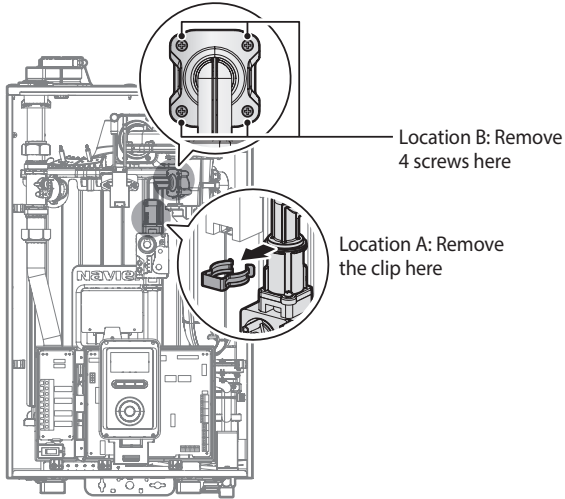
Detaching the Gas Valve Outlet Adapter from the Gas Valve and Fan Motor Assembly
